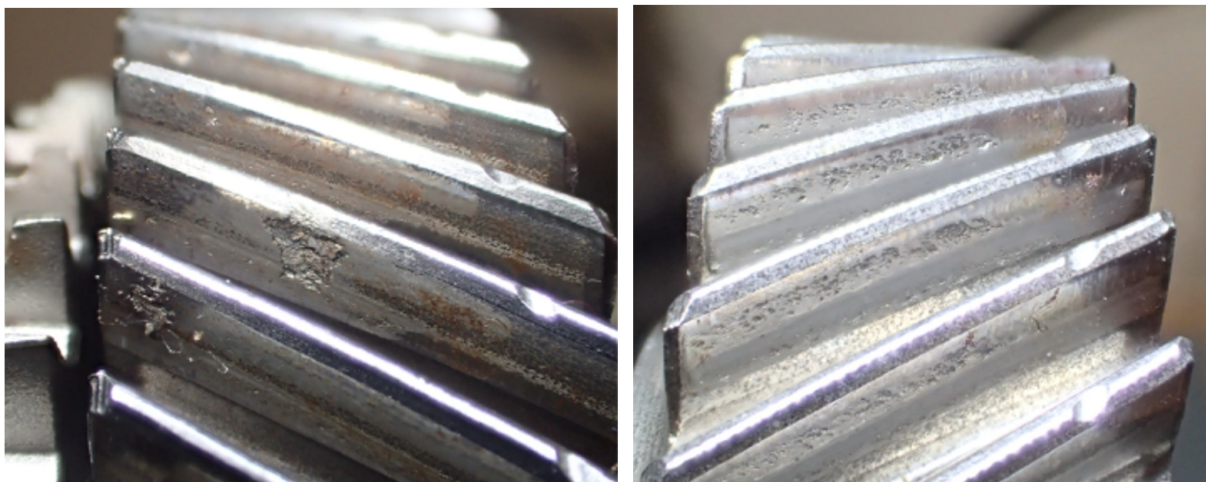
Pitting on serial gearwheels (pinion left) of 6th speed – gearset 1 - after 60 hours.
